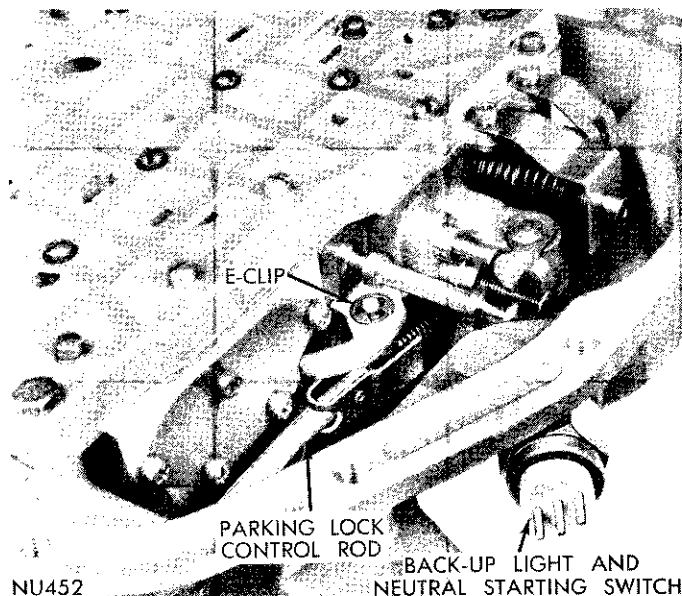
Parking Lock Control Rod Retainer E-Clip
